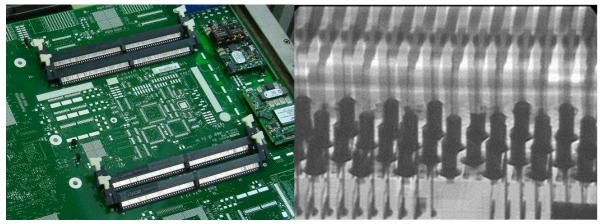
Several 240-pin dual in-line memory module (DIMM) connectors mounted in 22-layer printed circuit board assembly (left), and X-ray image of 100% PTH fill (right)
